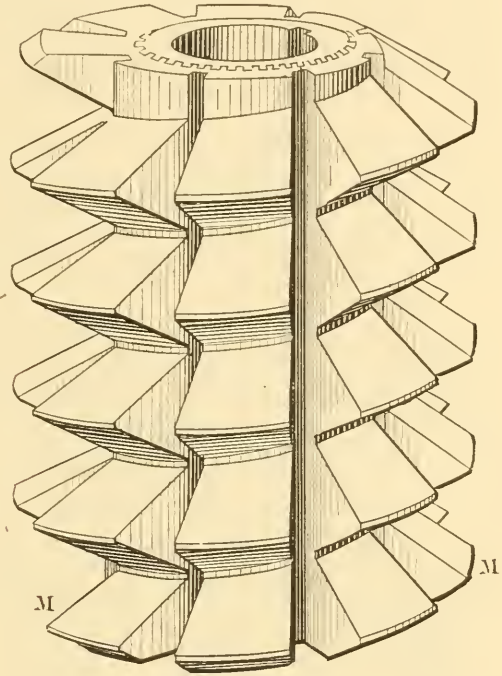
HOB USED IN CUTTING WORM GEAR OF FIG. 119.
